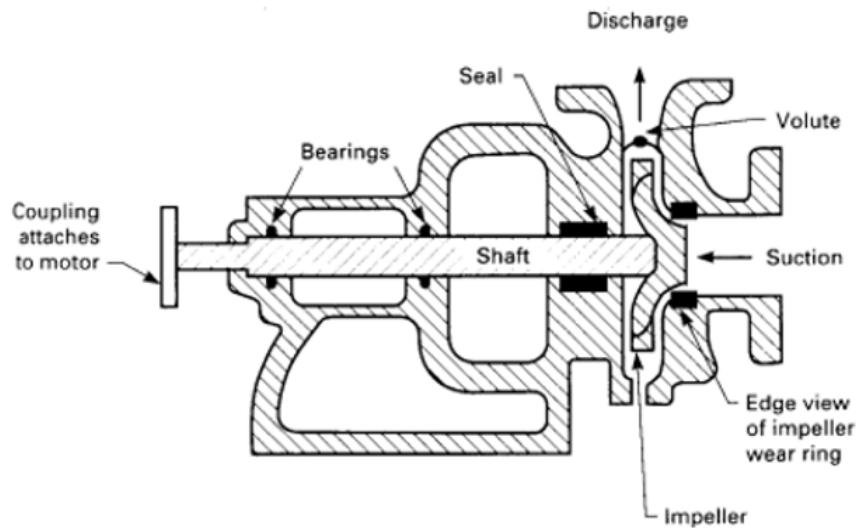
Assembly drawing of a general centrifugal pump (Wordpress.com, n.d.)
